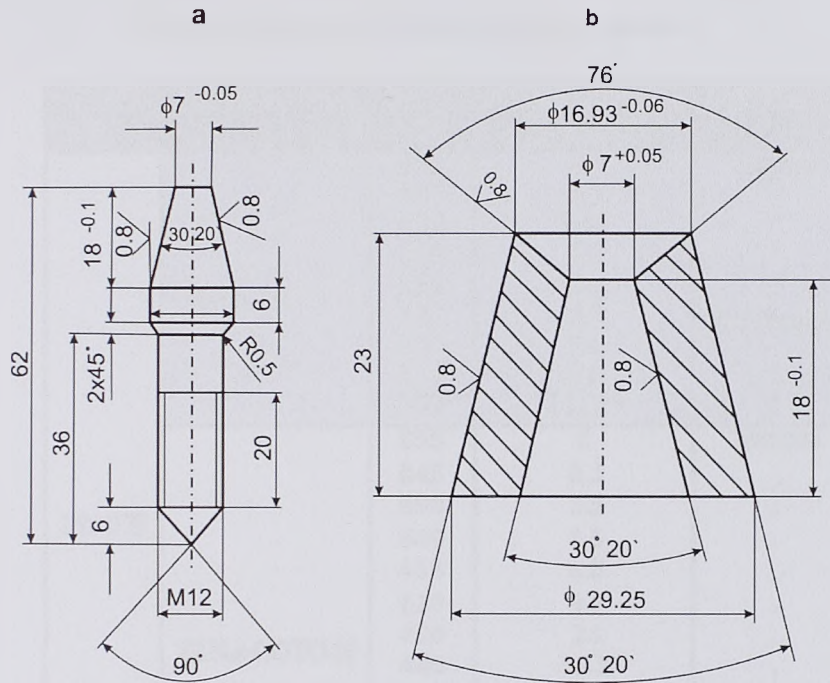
20Cabelka-Million probe for testing delayed cracking
